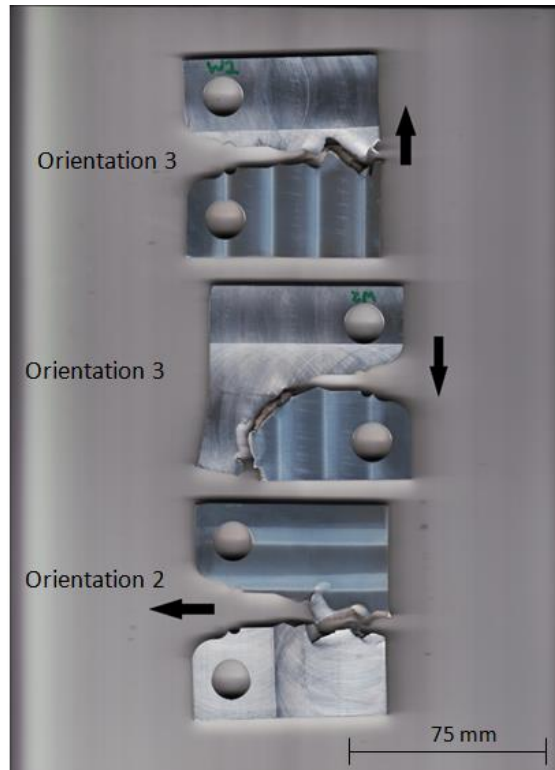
Fracture appearances of the thicker/slower/cast build samples
